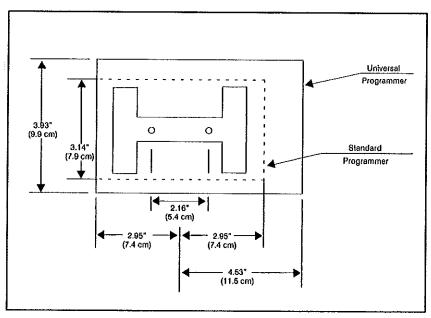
Standard and Universal Programmer Mounting Dimensions
